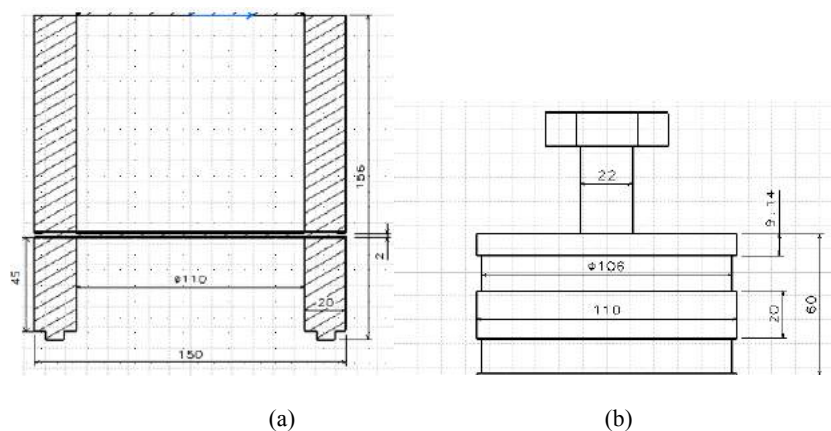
Technical dimensions of cylinder-piston set-up (Dimensions in mm), a) cylinder and b) piston
